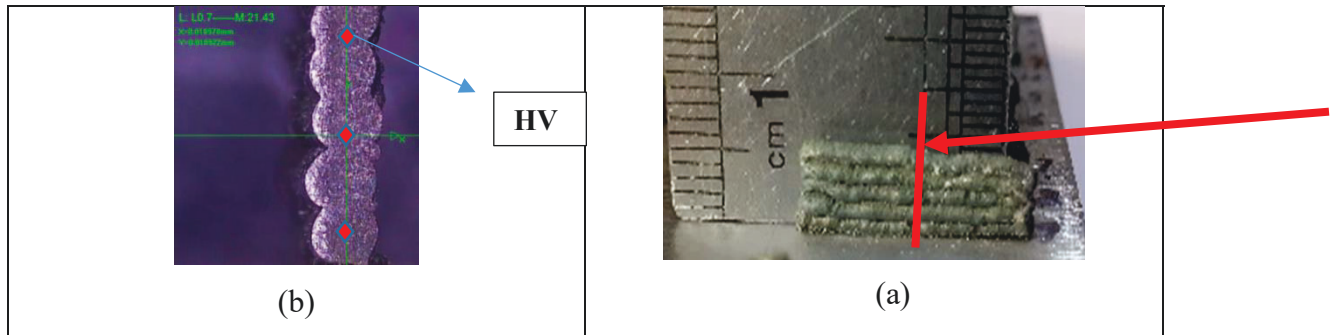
Parts (9) with optimal parameters a) Overview of the manufactured part, b) Cross-section of the part
